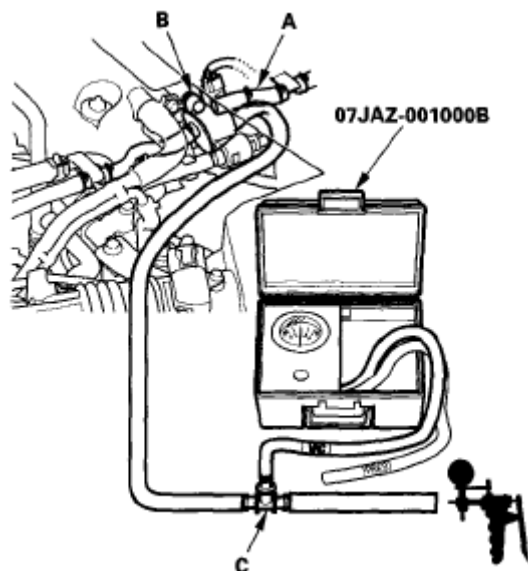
Disconnecting Vacuum Hose From EVAP Canister Purge Valve In Engine Compartment
